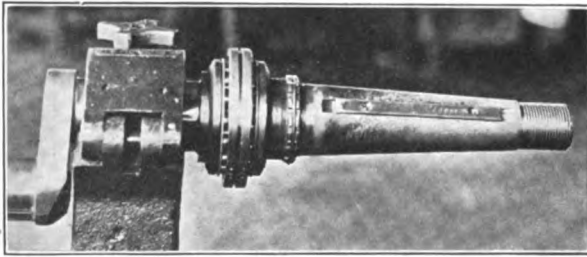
Crankshaft with thrust bearing propeller curb, models A, I and 'E.
